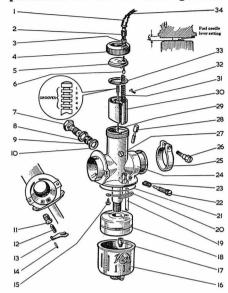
Exploded view of Villiers S.22 carburetor.
